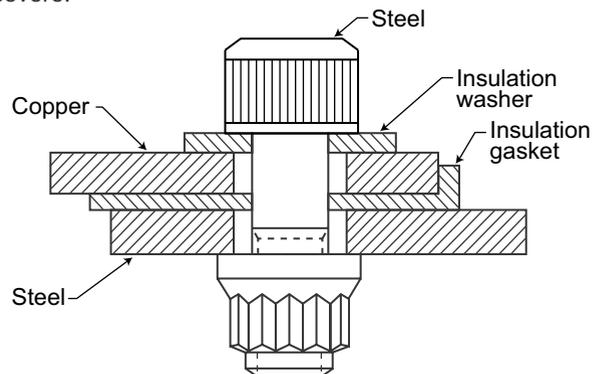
A method of electrically insulating a bolted joint to prevent galvanic corrosion.
